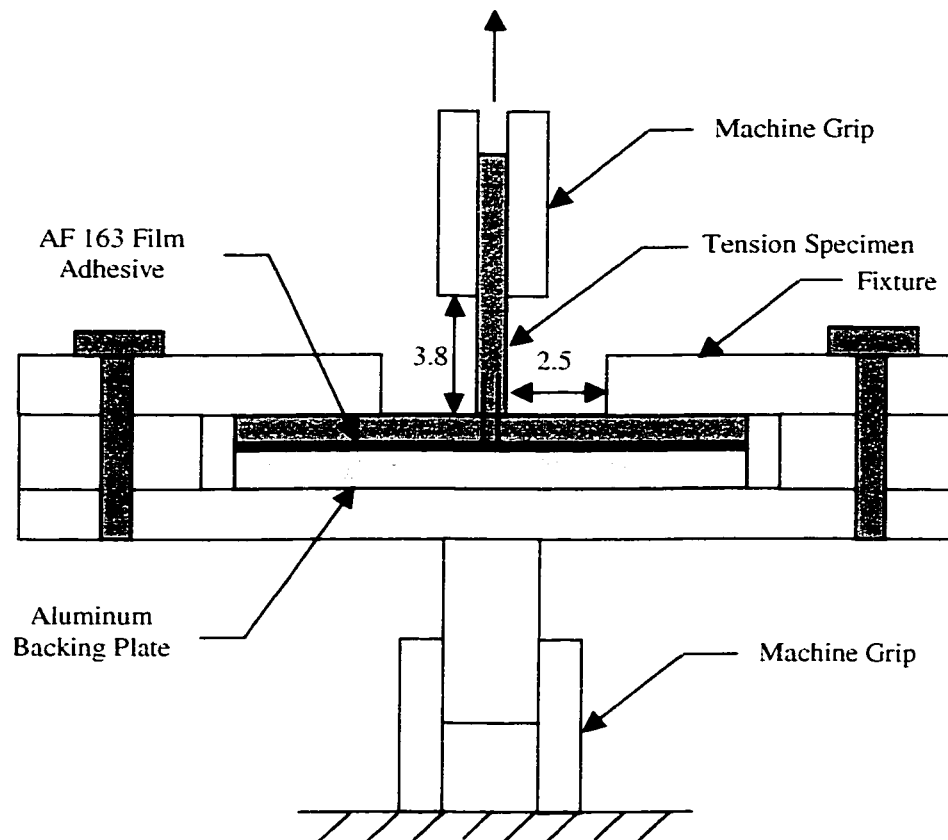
Fixed Support Tension Experimental Fixture (cm).
